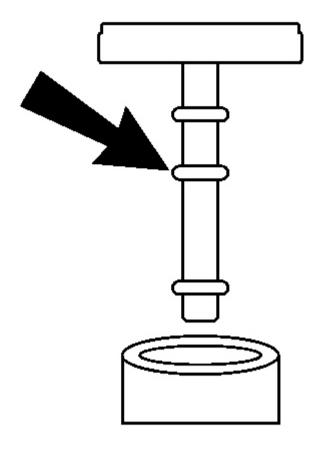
Removing Pump Reservoir Cap Courtesy of GENERAL MOTORS CORP.
